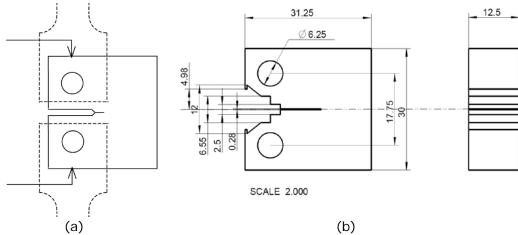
(a) schematic drawing of CT-specimen with PD and (b) drawing of the CT-specimen that will be used.
